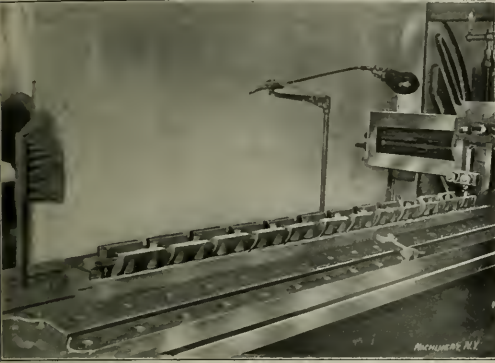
Fixture for Holding Caps for Bearings while Planing.
